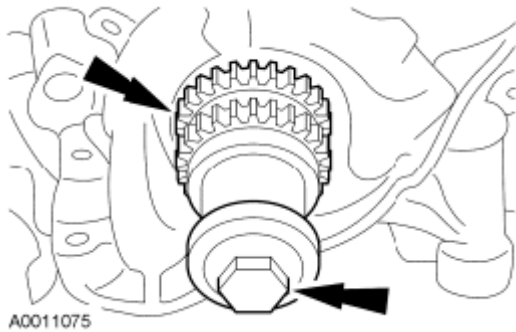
Locating Crankshaft Pulley Bolt & Crankshaft Sprocket
